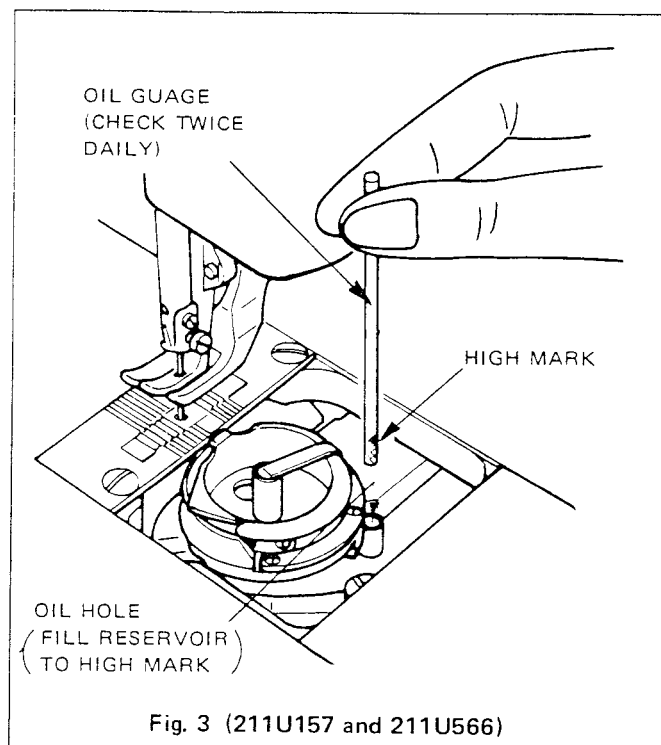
shows the oil filler hole for hook saddle reservoir on 211U157 and 211U566 machines.
